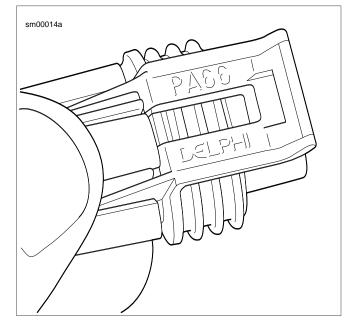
Delphi GT 150 Sealed Connector: Socket Housing Latch
